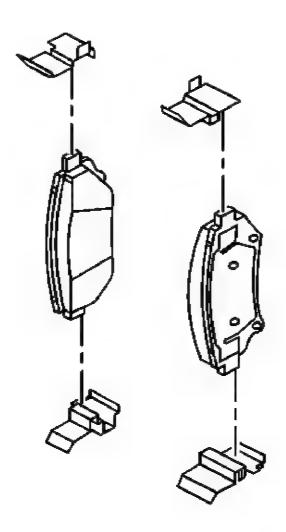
Disc Brake Pad Mounting Hardware Courtesy of GENERAL MOTORS CORP.
